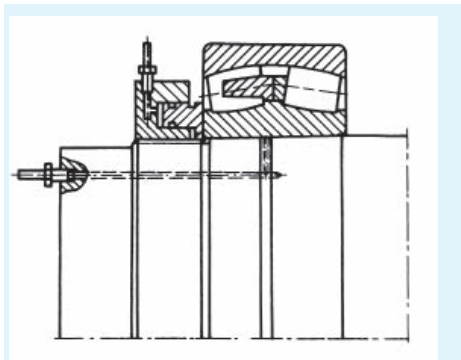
Bearing mounting on a taper seat using hydraulic nut
